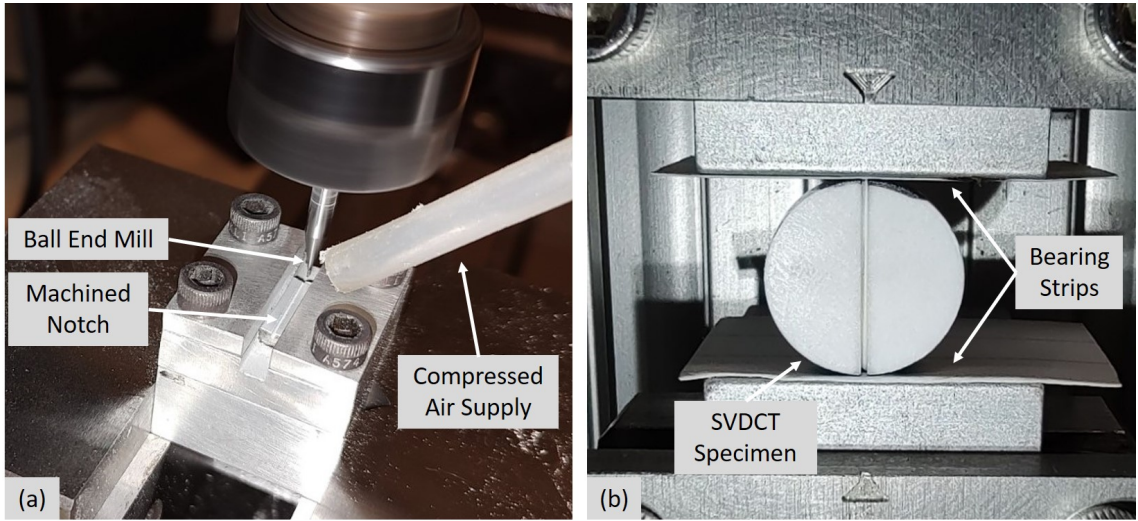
Overview of specimen machining and UTM setup with critical components labeled. (a) Machining of specimen using clamping jig and (b) typical UTM setup for testing specimens.
